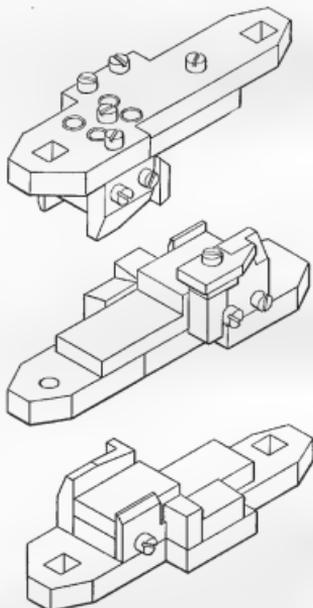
Pivotal-machine mould halves. Scale: half size.
